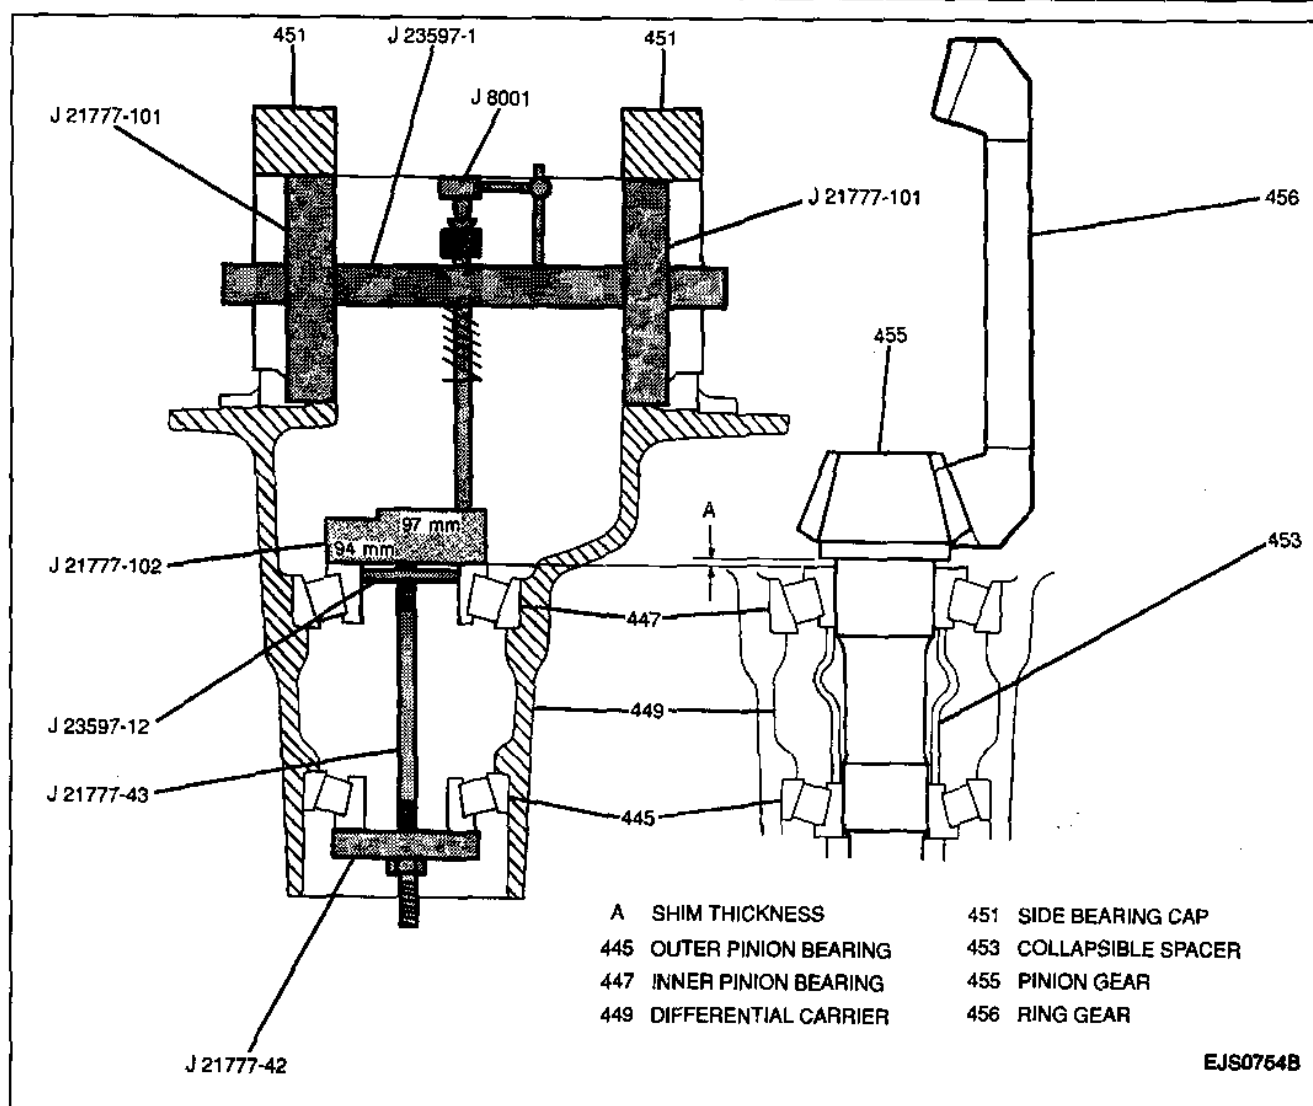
Special Tool Assembly for Measuring Pinion Depth
